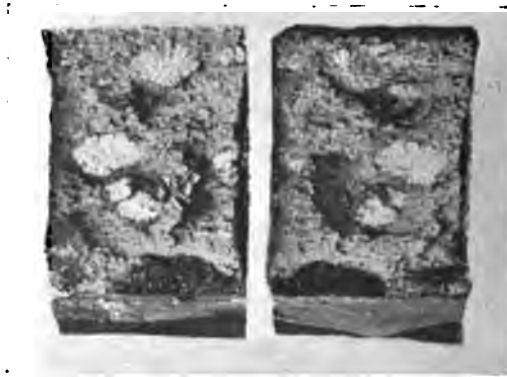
NICKEL-STEEL FORGING SPLIT TO REVEAL FLAKES. $\times 1$.
